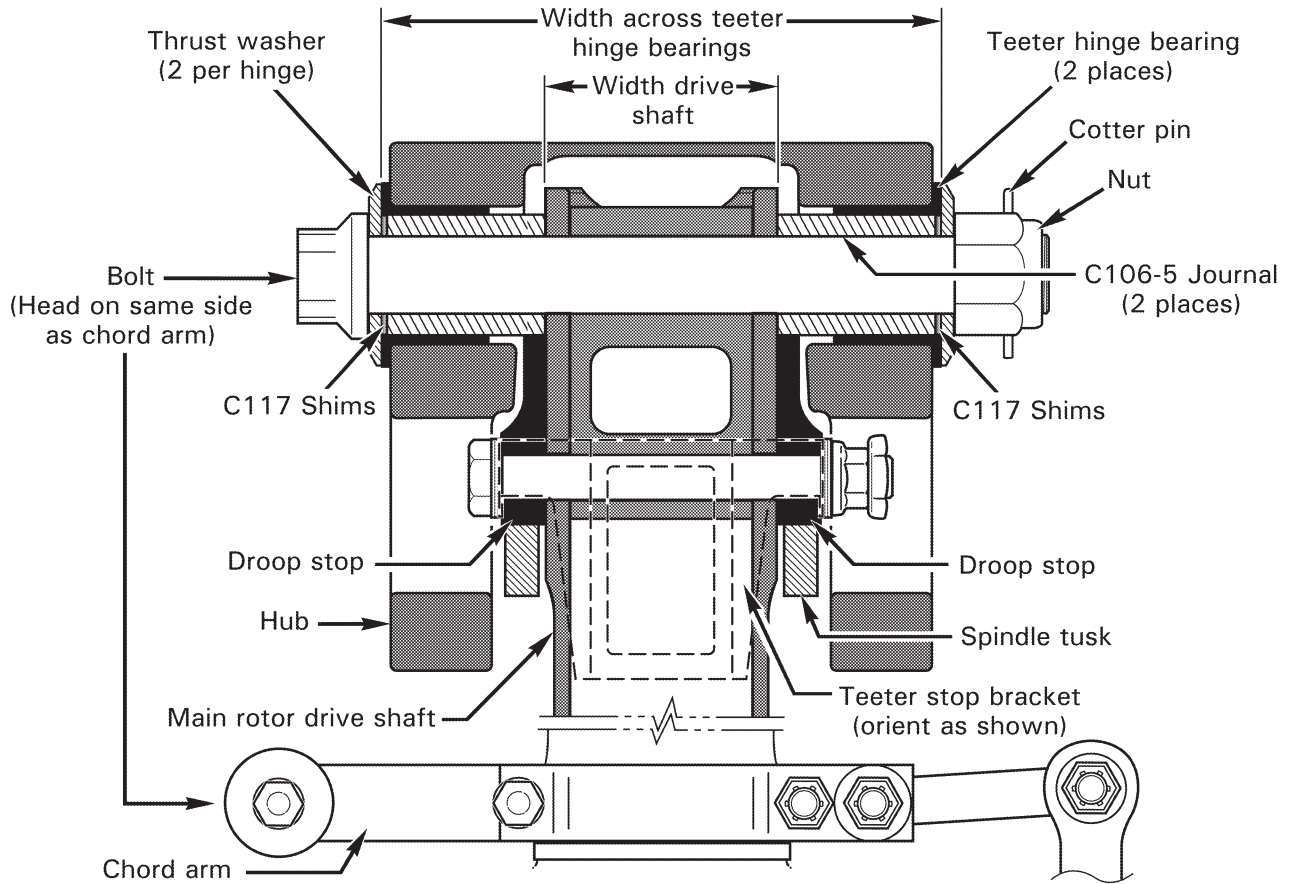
A TEETER HINGE (HUB INSTALLATION)
